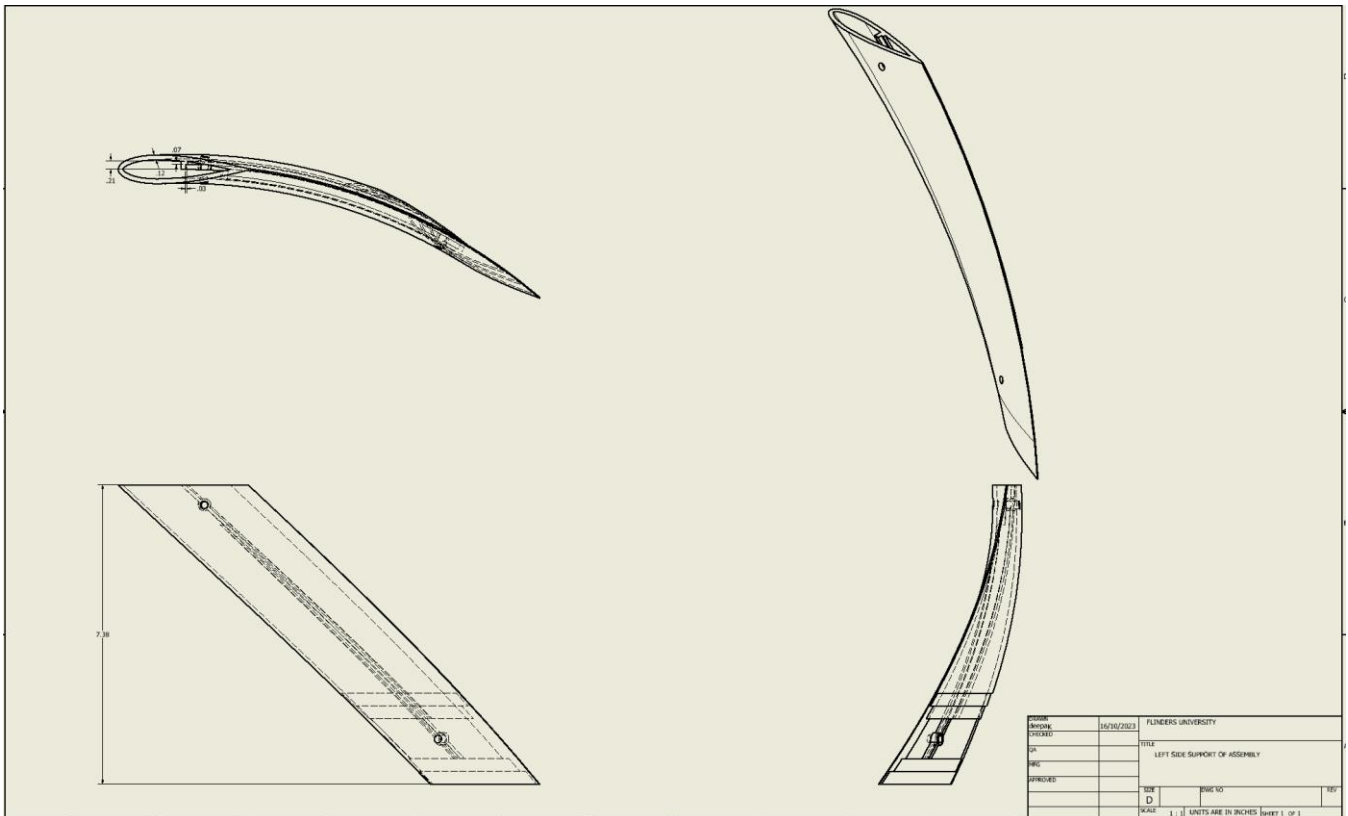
CAD drawing of Left side blade profile (towards the direction of Strain gage)
